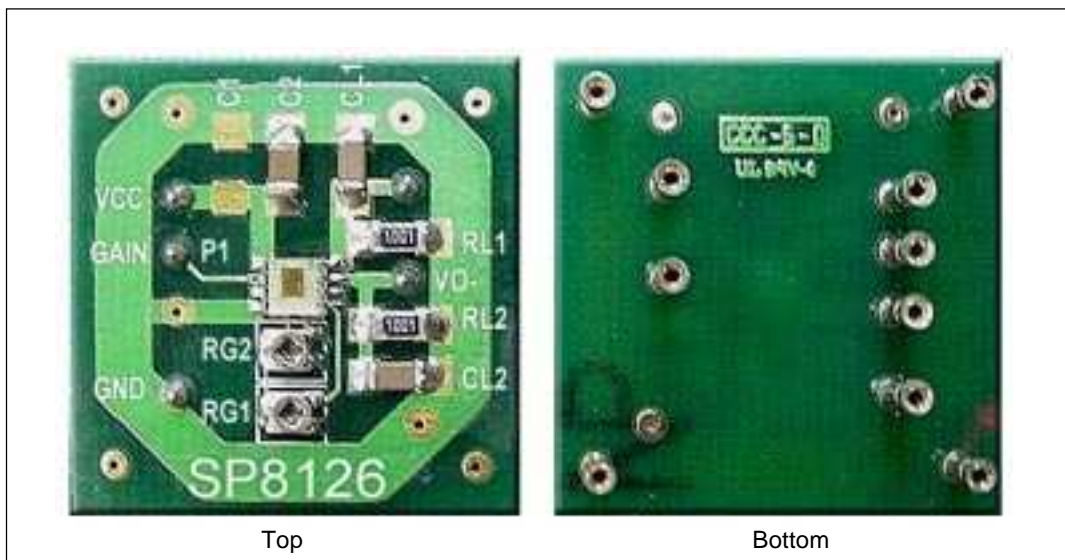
Test and Evaluation PCB Layout for COB 8 Lead Package
